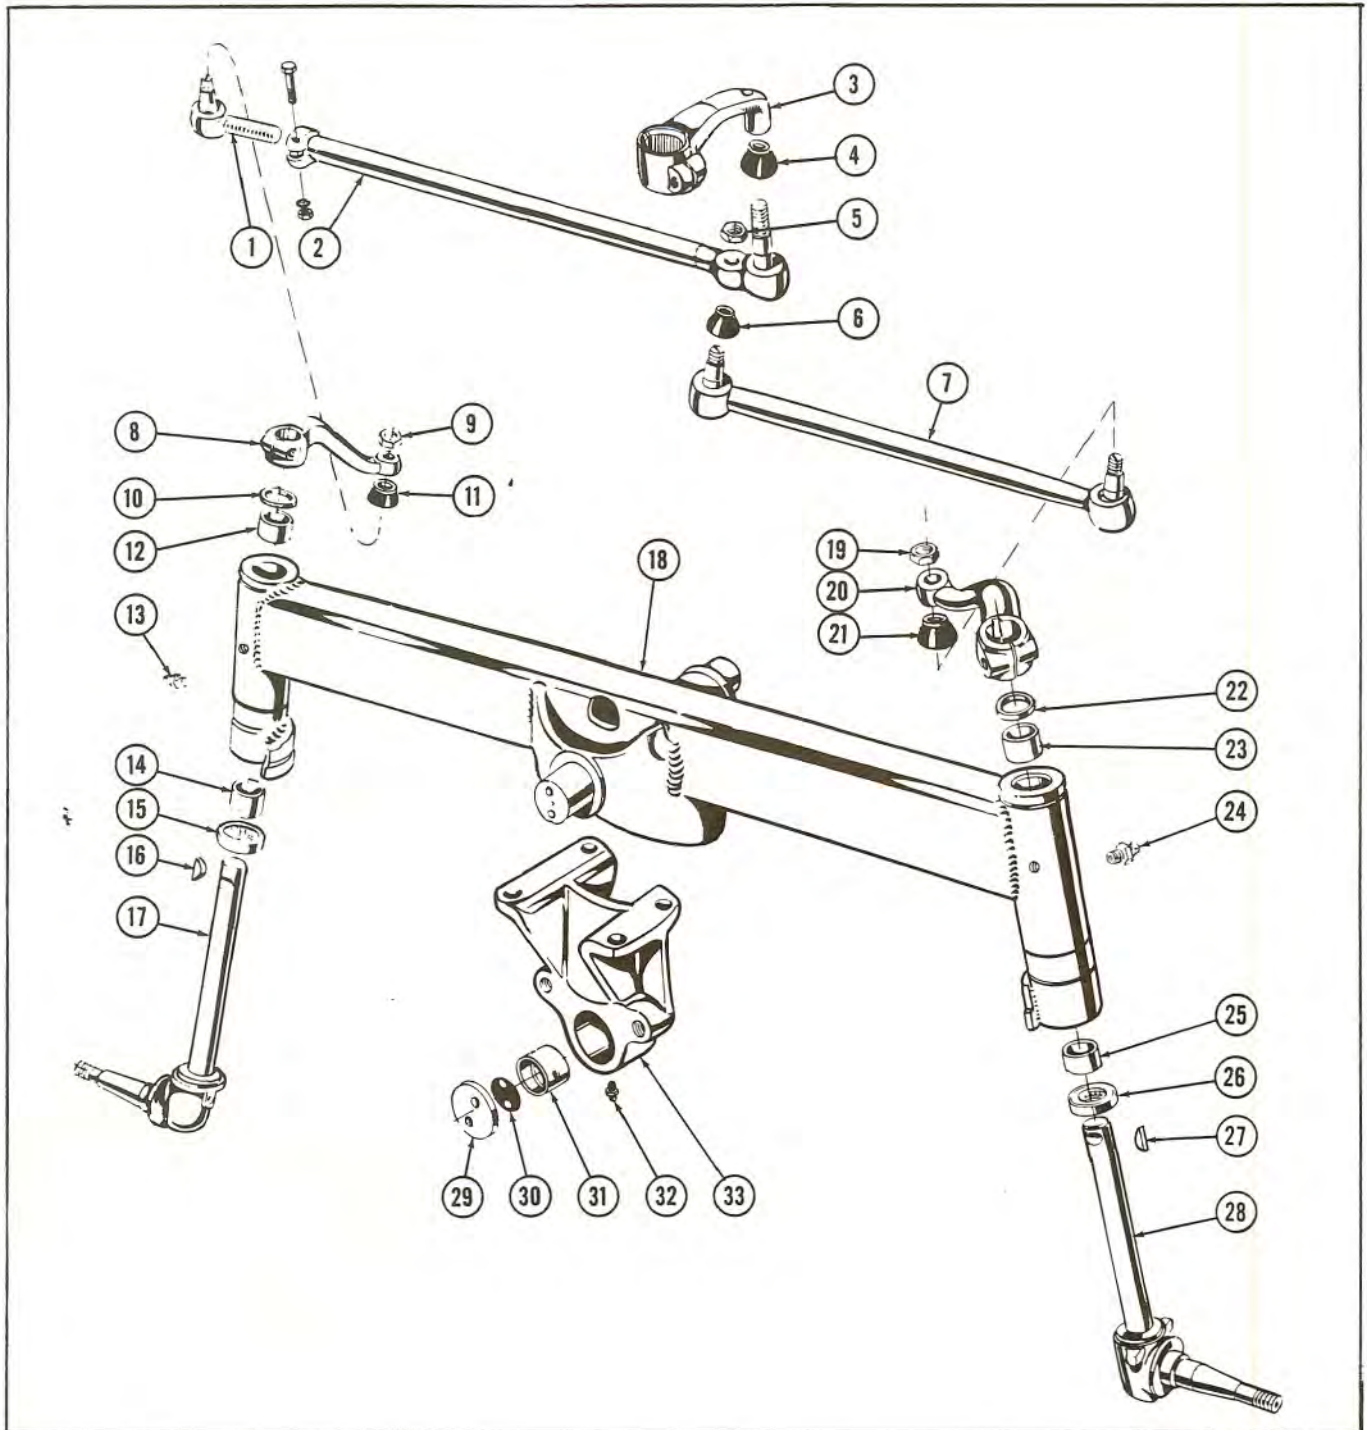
MF 50 Multi-Purpose Front Axle Assembly Nomenclature
